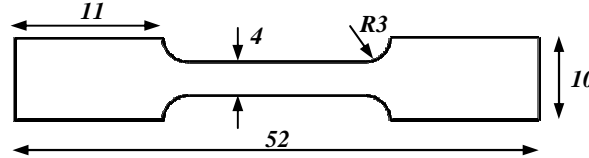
Geometry and dimensions of the in situ tensile specimens.
